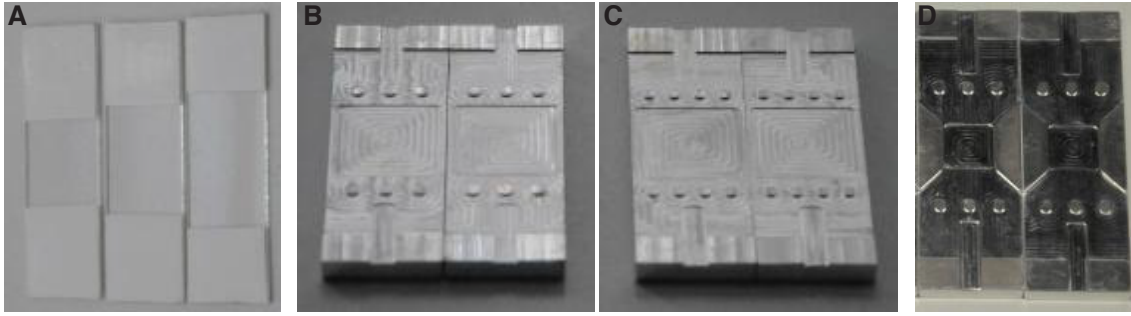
Customized casting molds tested in this work. (A) Self-made glass casting molds to produce rectangular HGs of different lengths. (B) Engineered aluminum casting molds to produce rectangular HGs with three holes. (C) Engineered aluminum casting molds to produce rectangular HGs with four holes. (D) Engineered aluminum casting molds to produce dog-bone shaped HGs with three holes.
